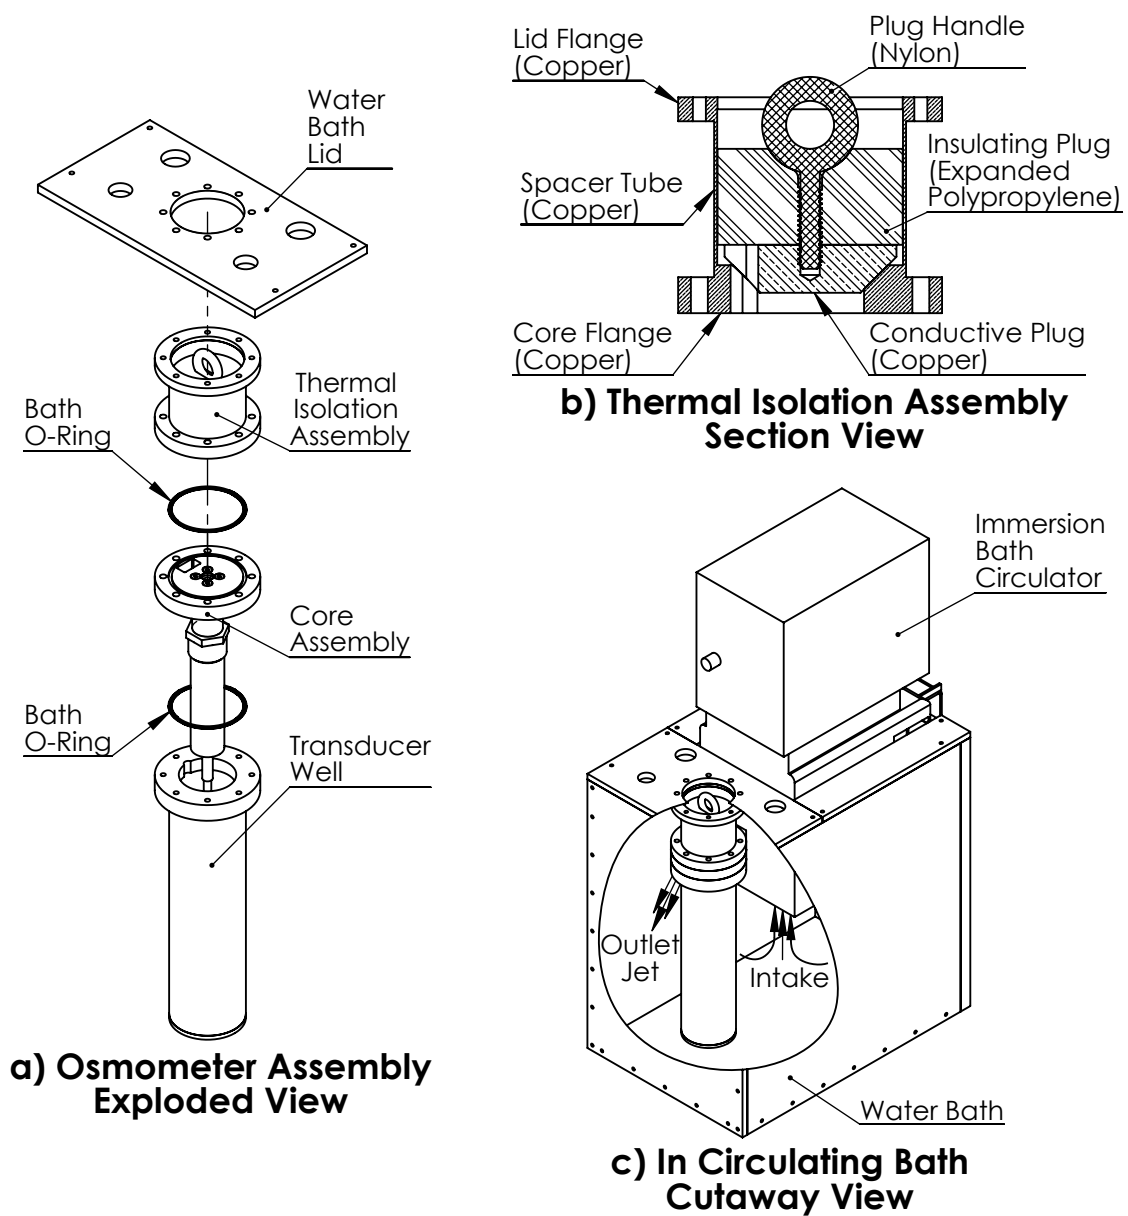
Improved Isolation and Temperature Control: a) Osmometer Assembly Exploded View; b) Thermal Isolation Assembly Section View: Note transducer cord slot in left hand side of conductive plug and core flange; c) Osmometer in Circulating Bath Cutaway View
